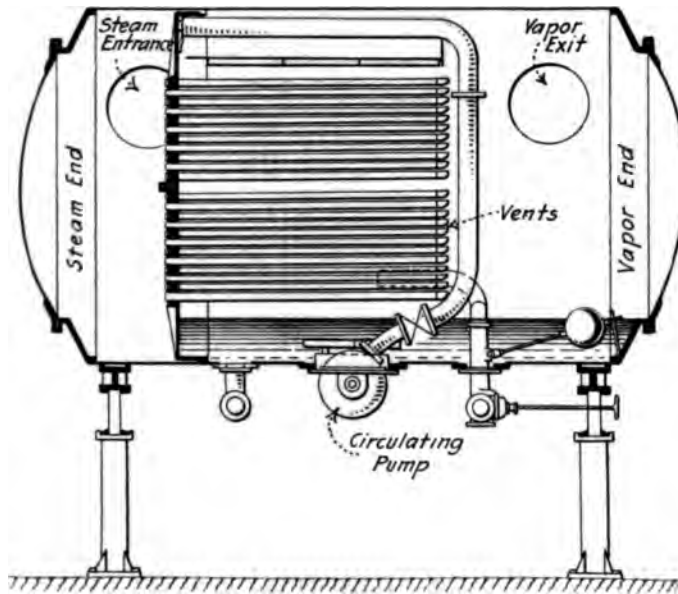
ONE BODY OF TYPE C EVAPORATOR
